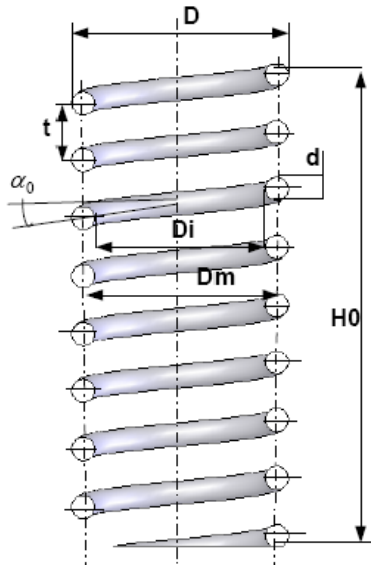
Geometric elements of cylindrical compression coil springs [7]
